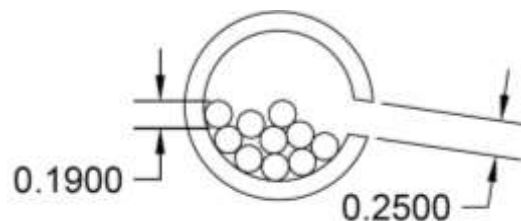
Illustrated Proposed Hard Conduit Cross Section
